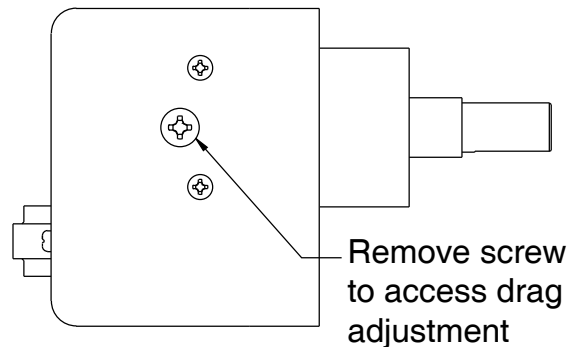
Drag Adjustment Screws for Side Mount Control Head Assembly
